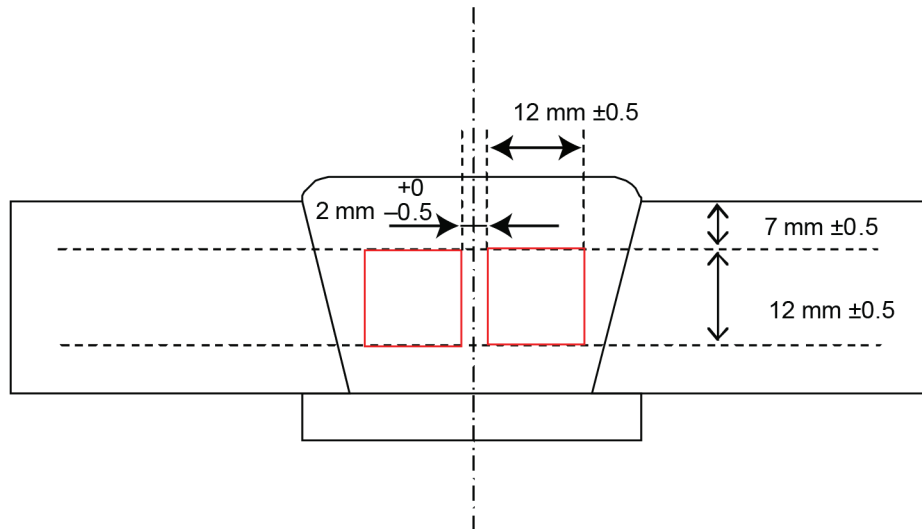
Position of Pre-forms inside the Welded Zone (Schematic View)
